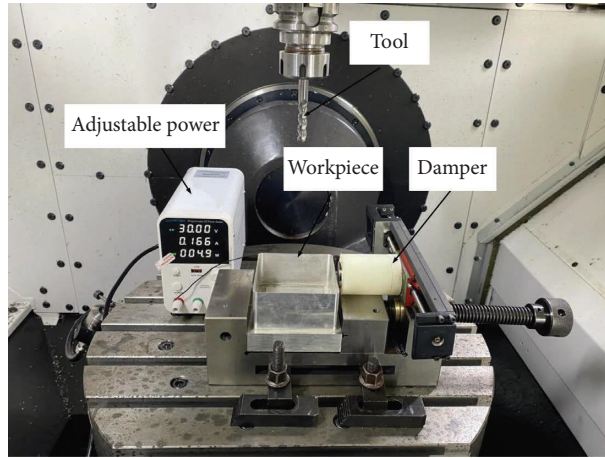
Settings of thin-walled aluminum-alloy machining.
